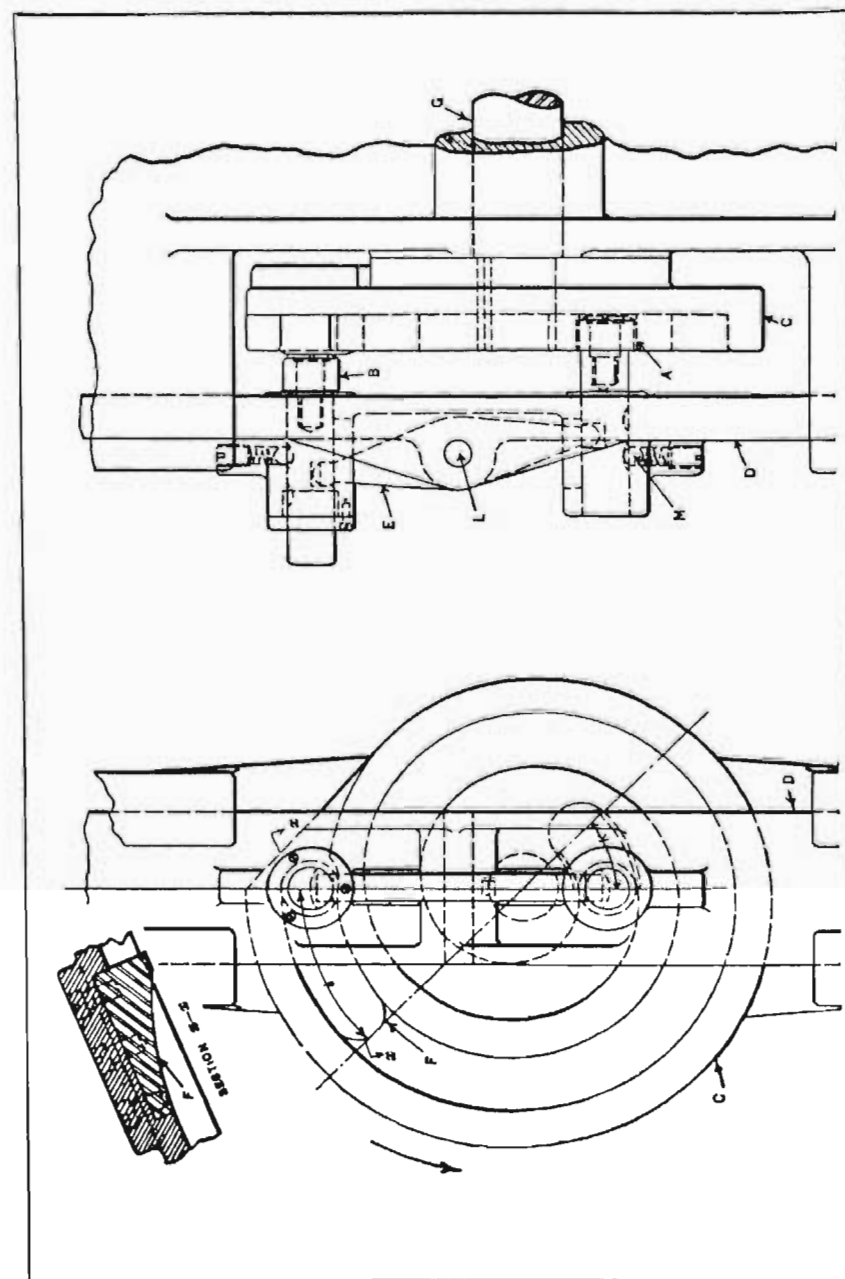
Spiral Cam which is Engaged Alternately by Two Rollers on Rocker Arm of Driven Slide
